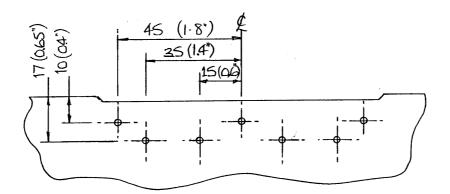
Rivet hole centres in flange - aileron L.E. Not shown
